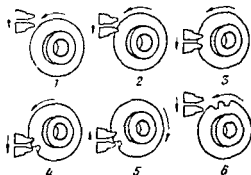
Successive positions of the tool and the gear blank in generating a straight bevel gear
